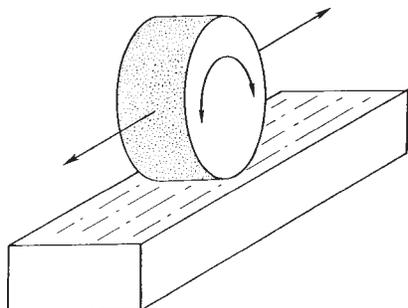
Surface Grinding Parallel to the Specimen Longitudinal Axis
